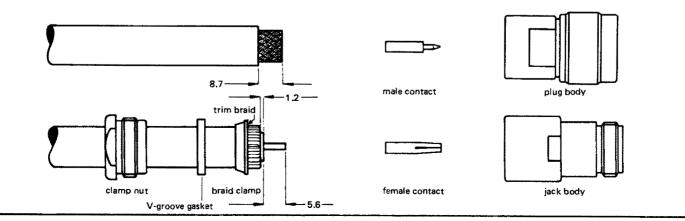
Improved MIL-style braid clamp, captive centre contact
